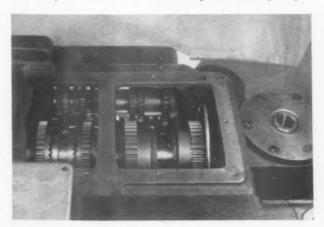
Top view Man-Au-Trol Unit showing Feed Works gearing.
